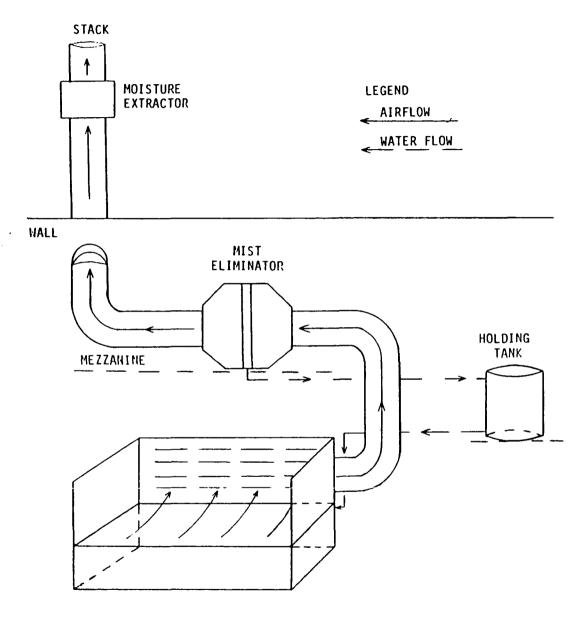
Schematic of new hard chromium plating tank at Able Machine Company.
